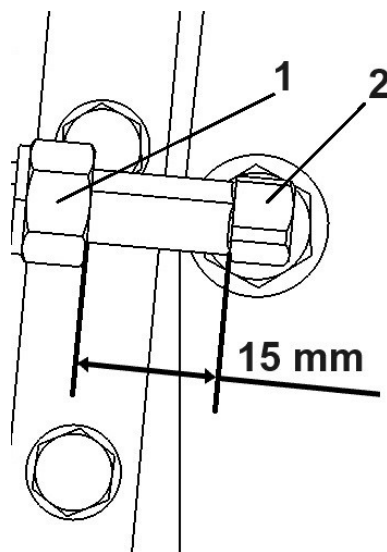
Adjusting the transmission chain tension: 1 – lock nut, 2 – adjusting screw
